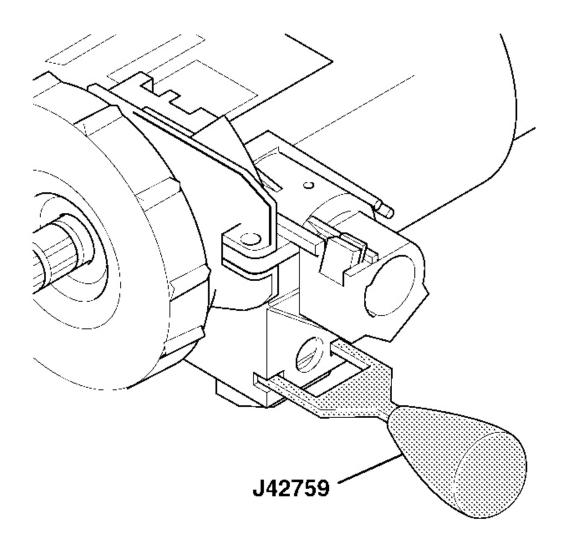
Inserting J 42759 Into The Lock Cylinder Housing To Release The Tabs On The Ignition Switch
